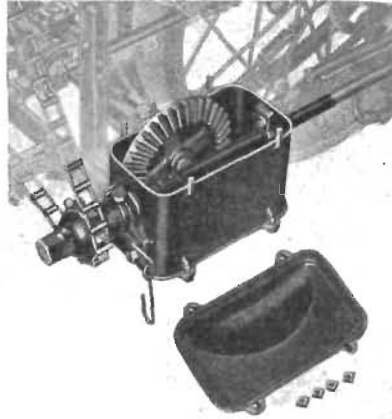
Enclosed gear case and oil bath for bevel gears on the countershaft and crank shaft of grain binder.
